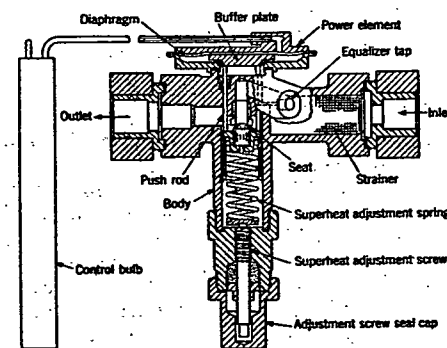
TYPICAL THERMOSTATIC EXPANSION VALVE
